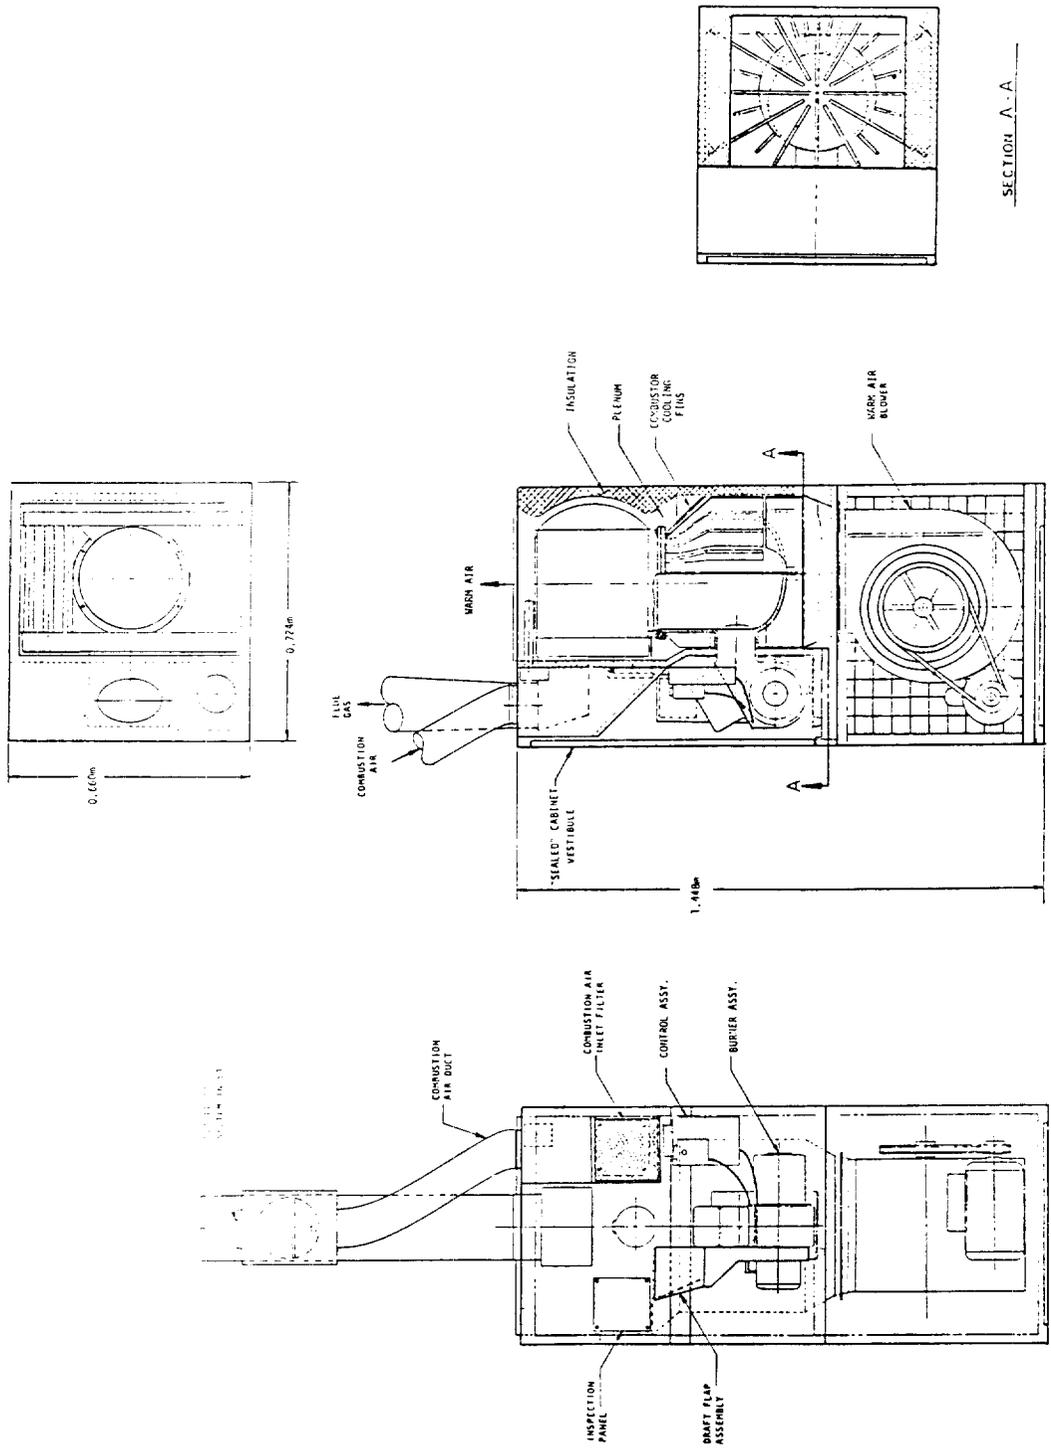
Layout Assembly Drawing, Prototype Optimum Warm-Air Oil Furnace
